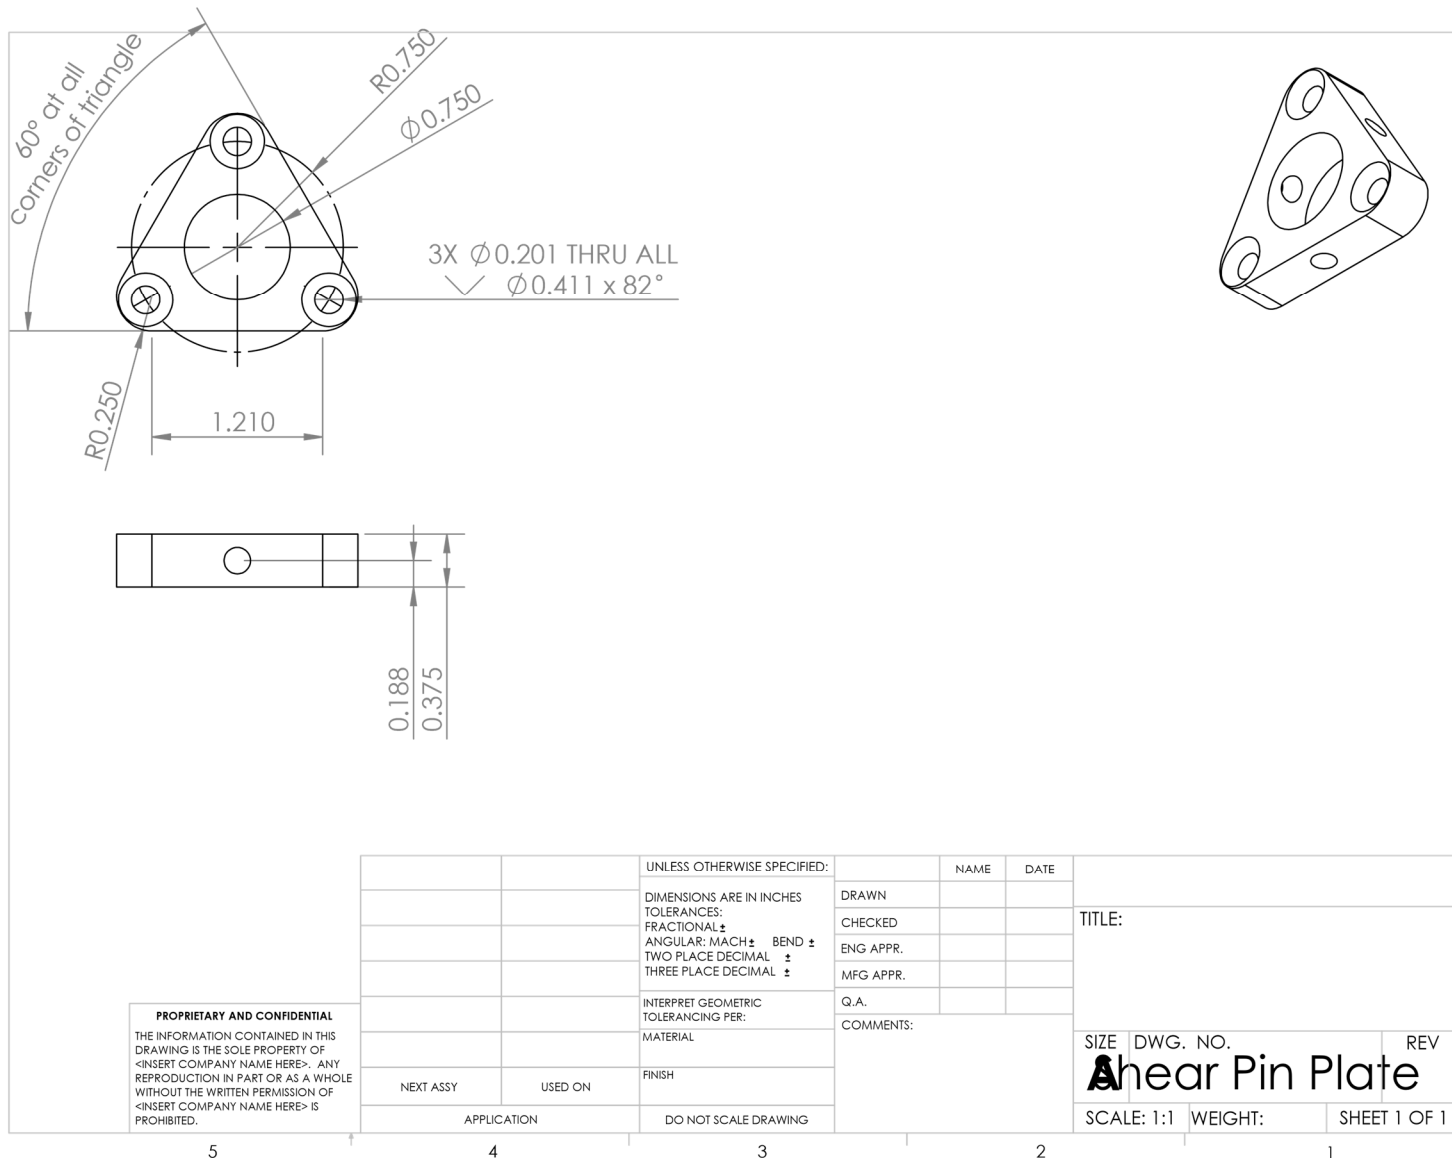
Nozzle Retaining Shear Pin Plate Machine Drawings
